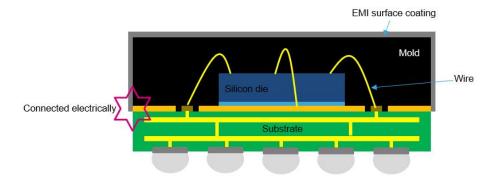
Cross-sectional view of the unit using substrate with EMI shielding layer
